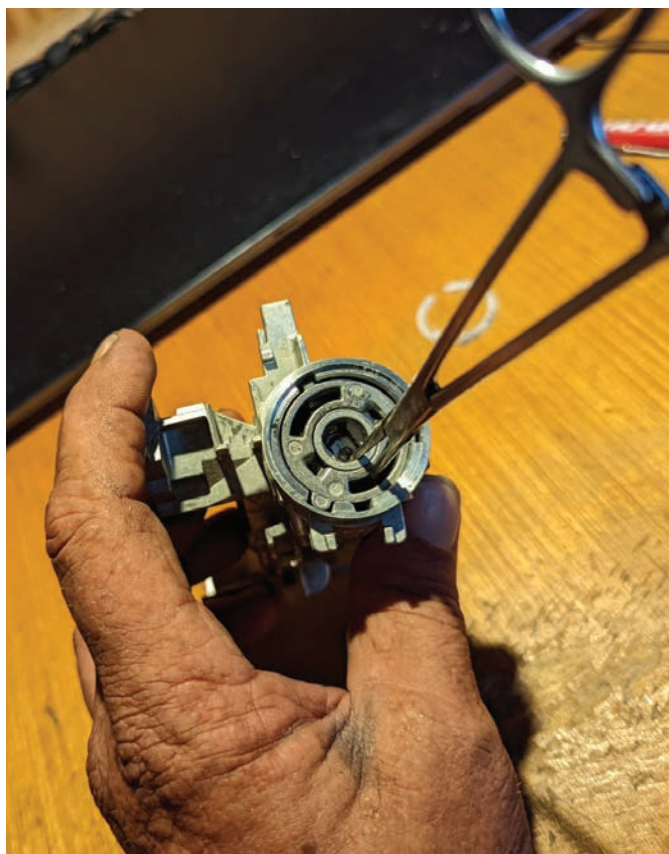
The author is removing the first half of the internal assembly. This is a two-piece group that interlocks, so removal and reinstall as a group is important.
